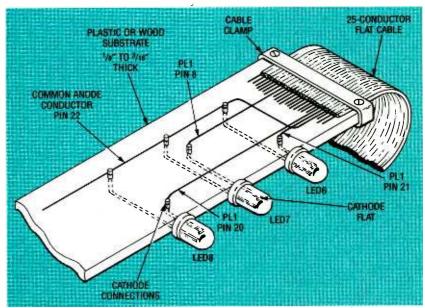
DETAILS FOR BUILDING THE INDICATOR PANEL. LED leads are bent and inserted in drilled holes in wood or plastic strip and soldered connections are made as shown. Protect exposed conductors with tape or covers (not shown).
